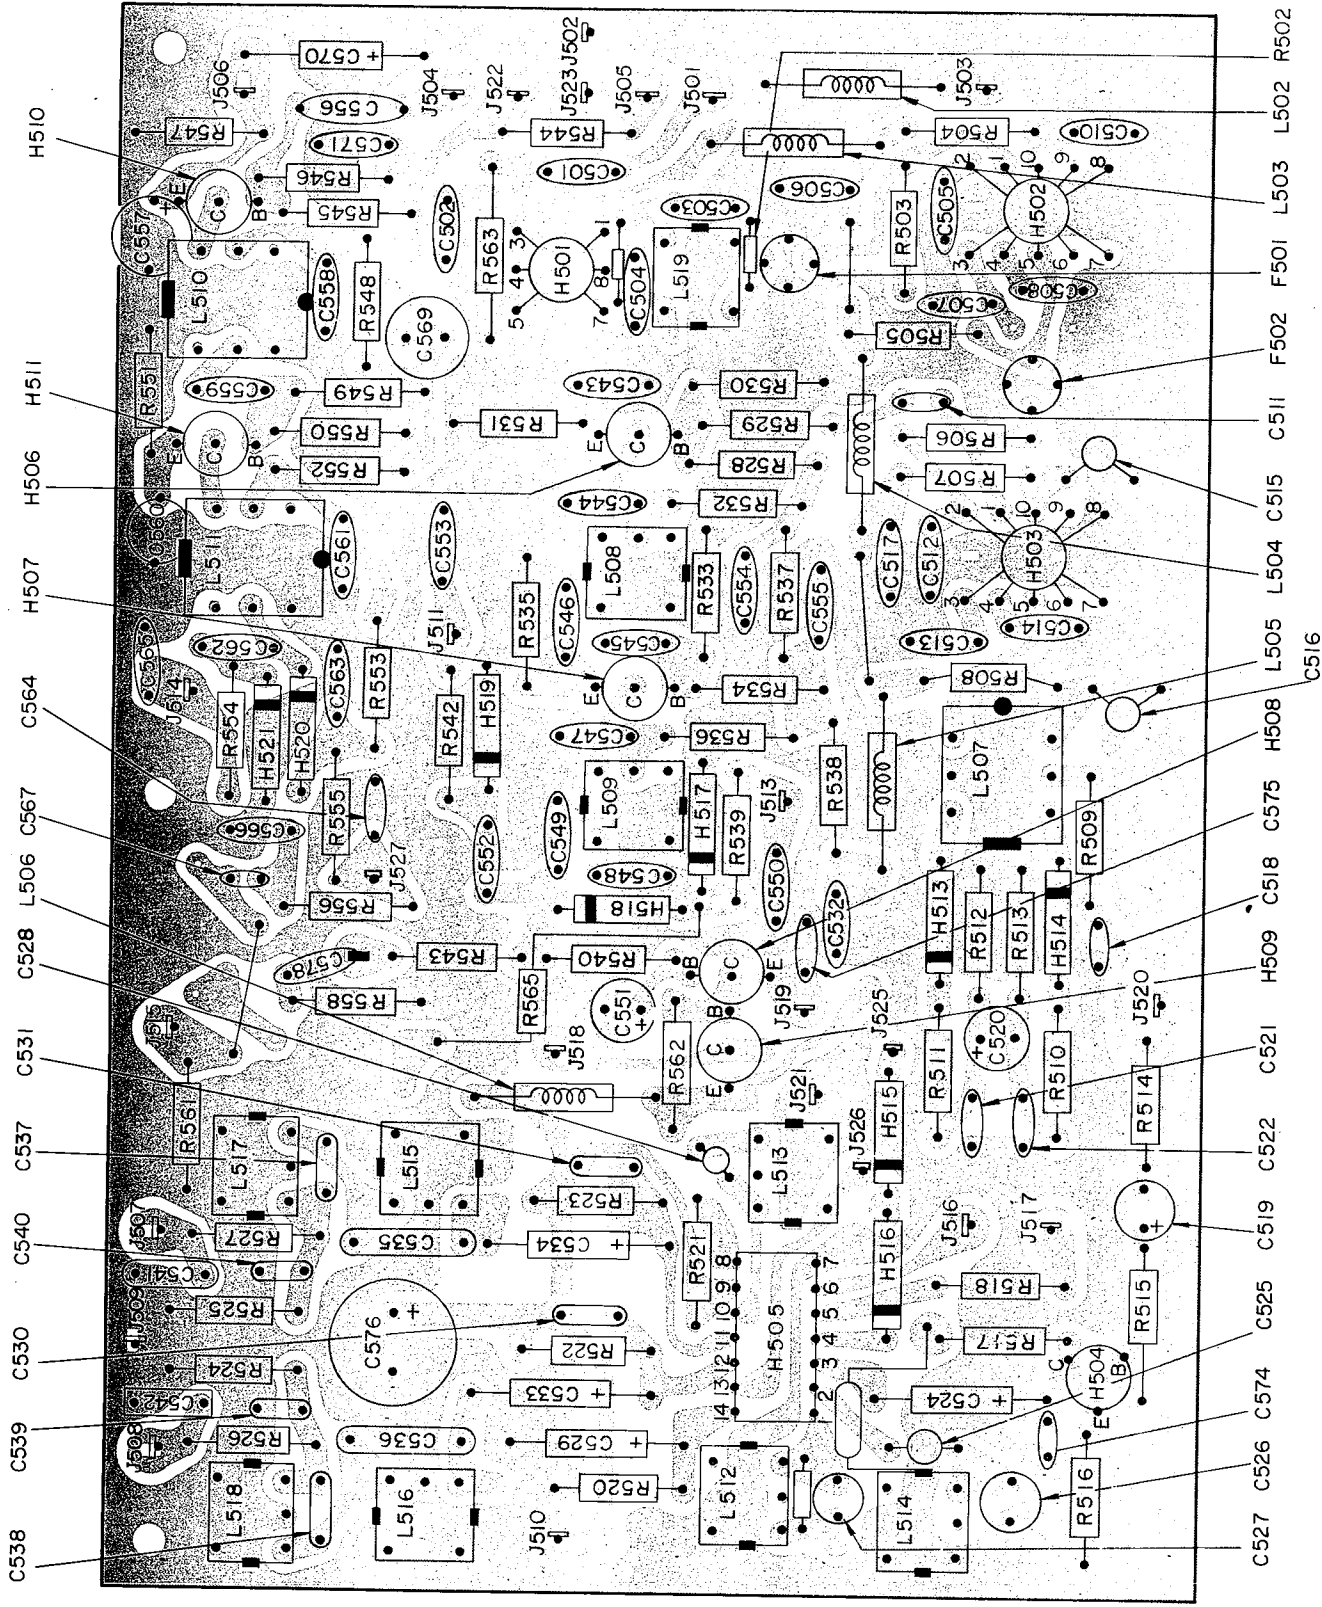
AM-FM IF and FM-MPX Demodulator Assembly P500 Component Locations
